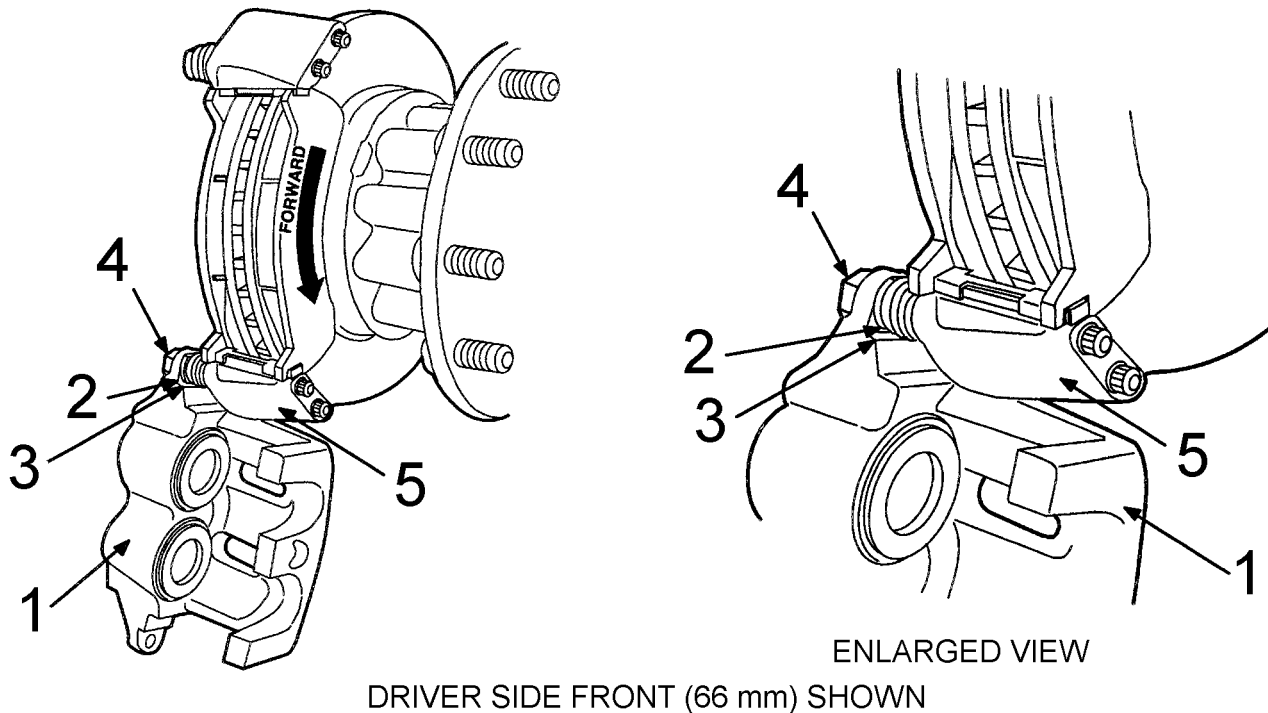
Install Caliper onto Anchor Plate and Install Lower Hex Flanged Mounting Bolt
